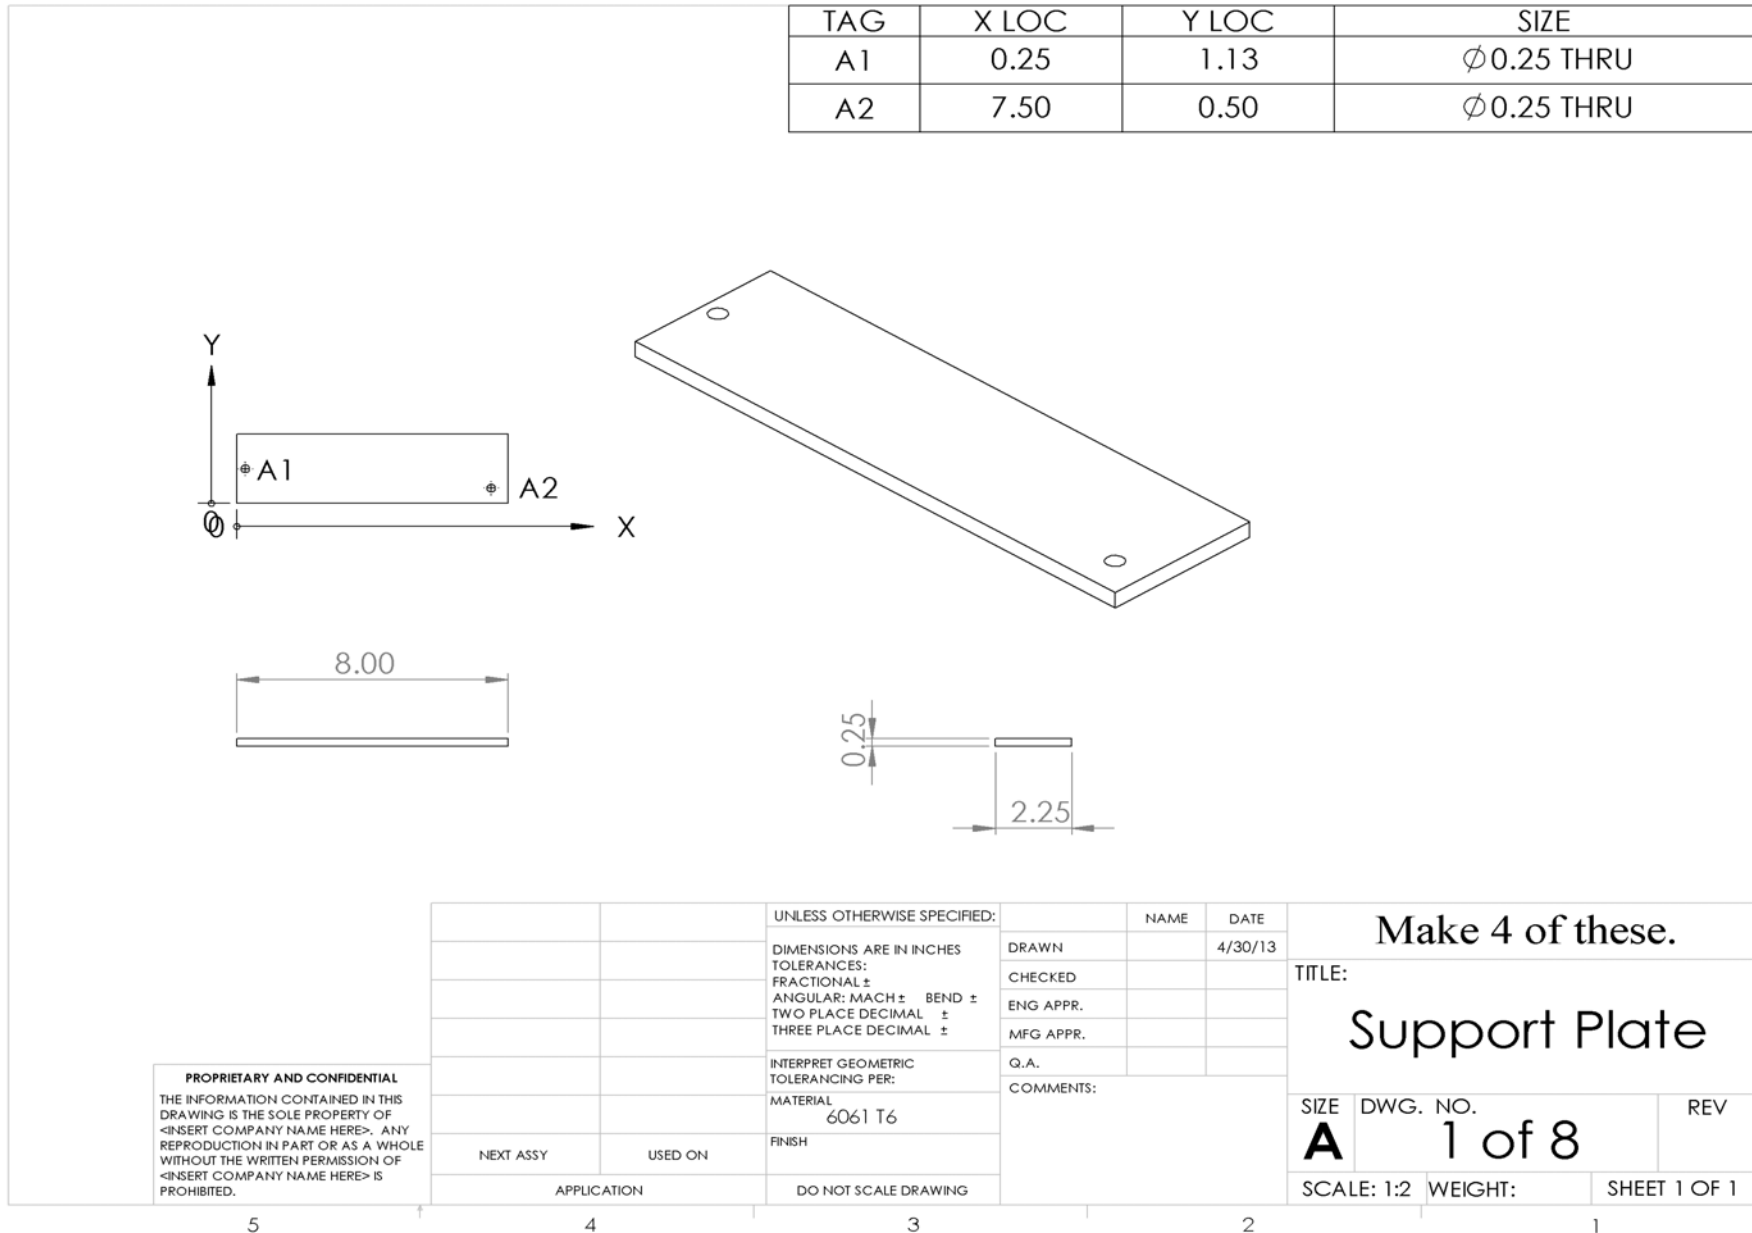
Support Plate*. Four of this piece must be made. These plates will connect to the Fitting Jigs through the off-center edge holes and some threaded rods with nuts and will connect to each other by use of the centered edge holes. These four piece will sandwich the back arch and hopefully keep the whole assembly together.
